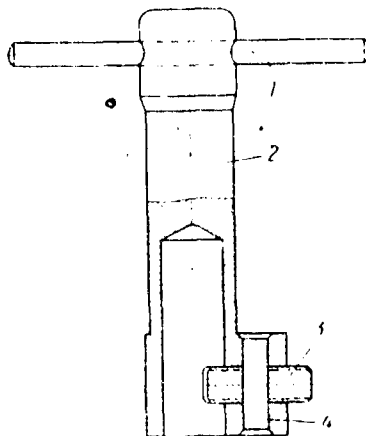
Cam (Eccentric) Wrench: 1 - handle; 2 - frame; 3-cam; and 4 - cam axis.
